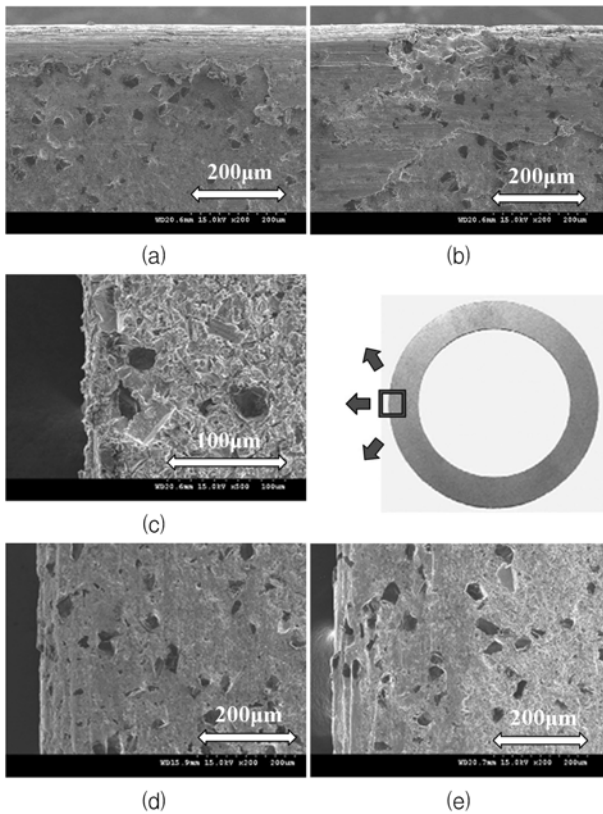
SEM photographs of micro-blade surface: (a), (b) MA2, (c) before dicing test, (d) MB2 and (e) MV2 after cutting 24,795 mm³/cc of glass workpiece respectively⁴⁾.
